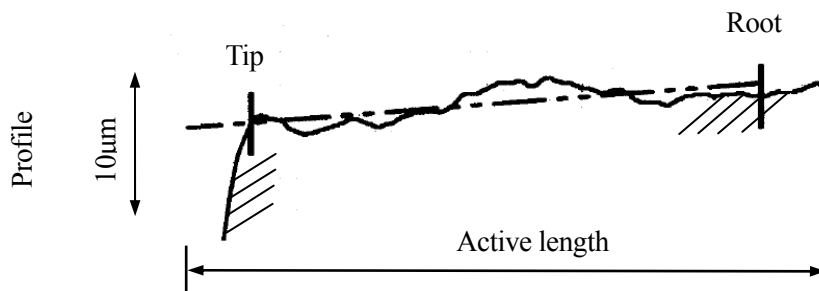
Tooth profile, 1st gear of Reducer A
